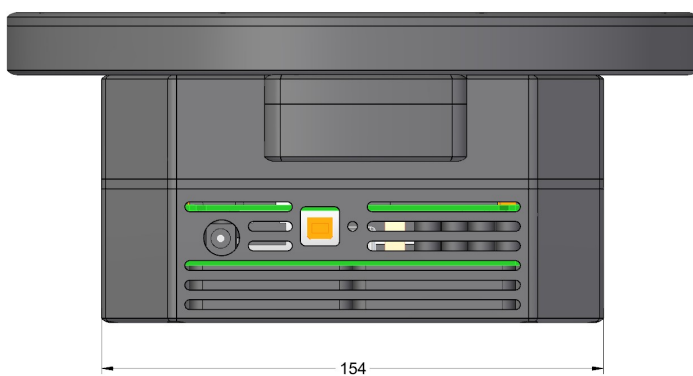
G3 camera with enhanced cooling and “S” size external filter wheel bottom view
